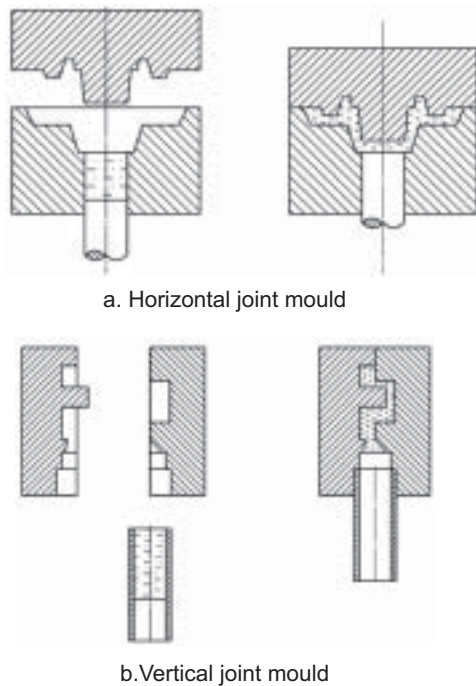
Sketch of indirect squeeze casting method (bottom squeeze)
